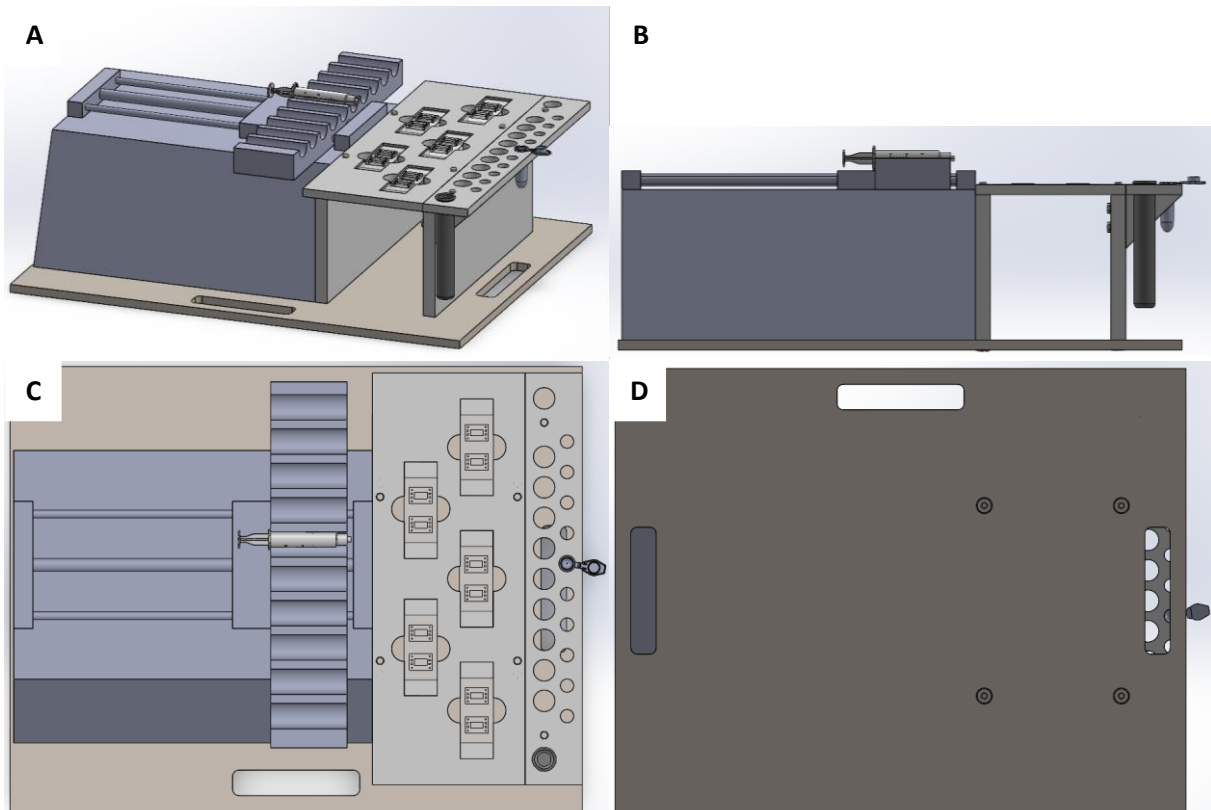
Total assembly of the holder including every part produced in SolidWorks, providing isometric (A), side (B), top (C), and bottom (D) view.
